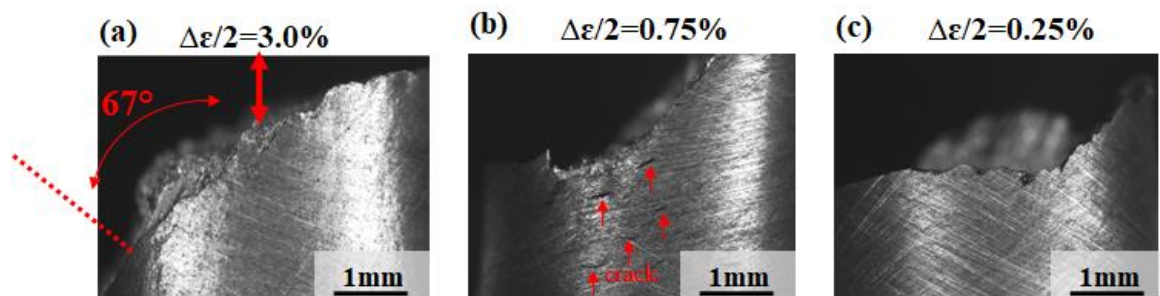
Optical microscopic images for the side view of the fracture surface at the strain amplitude of (a) 3.0%, (b) 0.75% and (c) 0.25% for $\theta = 22.5^\circ$. Red arrows show the fatigue cracks on the specimen surface.
